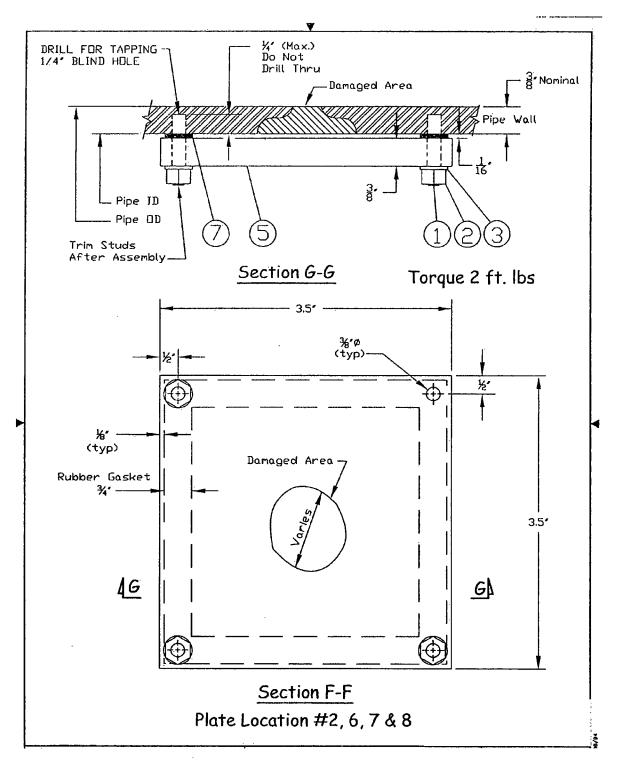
Typical Bolted Patch Plate Drawing Sections F-F and G-G Views
